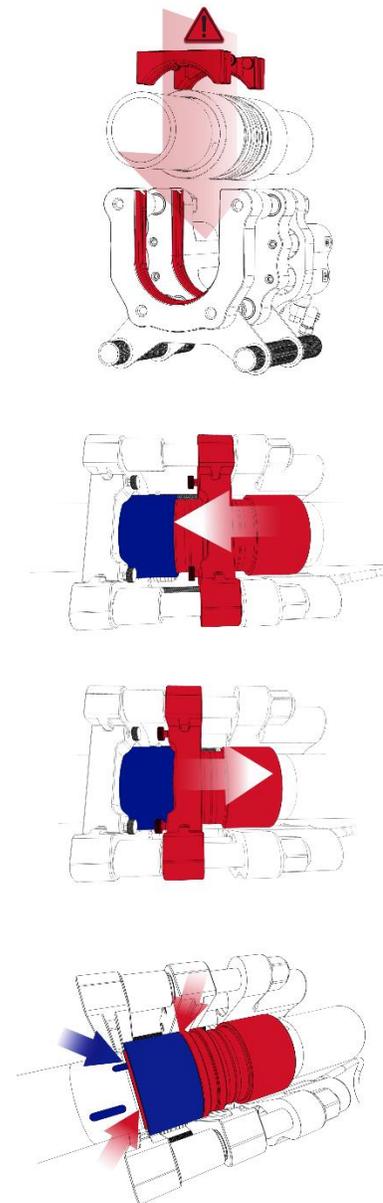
Lokring Fitting Installation Using the Guide-Rod Tools
